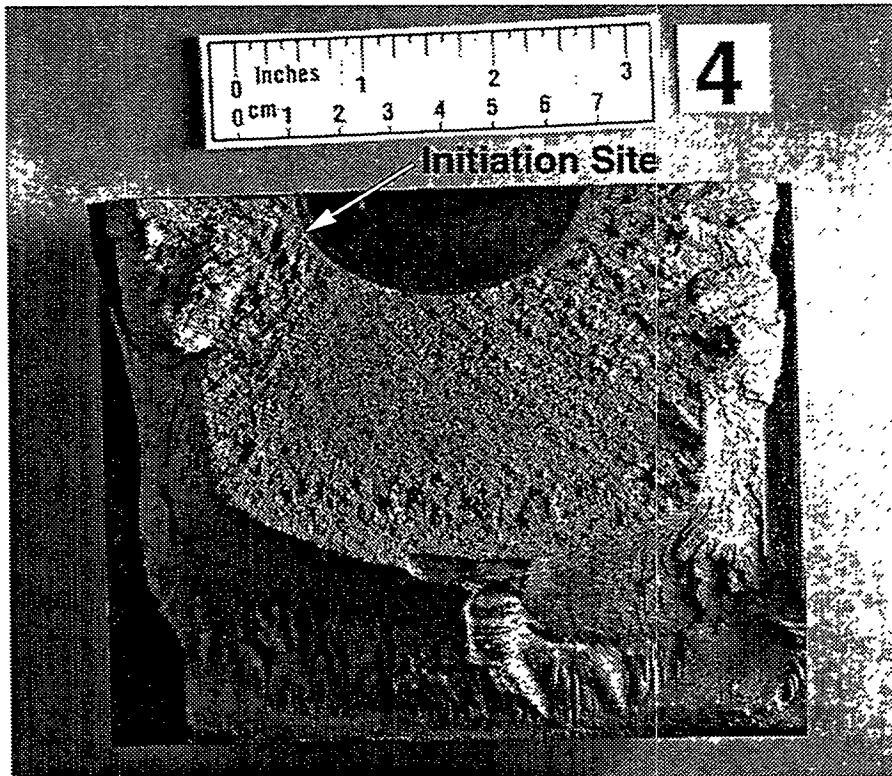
Fracture surface for finite-length flaw specimen CF-6 showing location of cleavage initiation site
